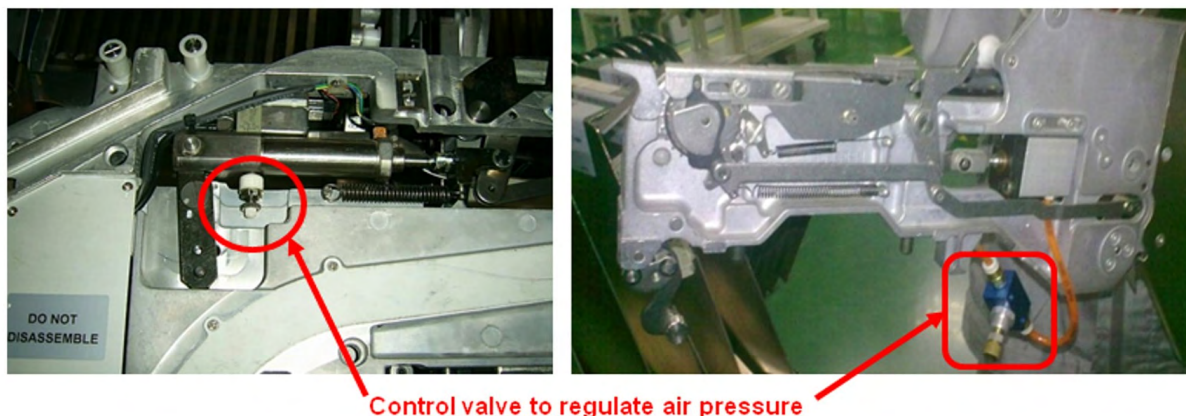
Pneumatic feeder with integrated air pressure control valve (left) and pneumatic feeder with air pressure control valve installed afterwards (right).
